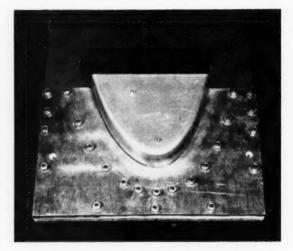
View of flanged aluminum-sheet part over form-block with clip still in position.
